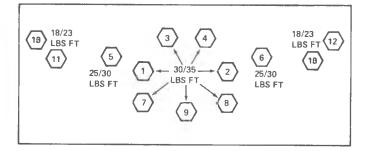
A—Exhaust Manifold to Cylinder Head Bolt Tightening Sequence and Torque
